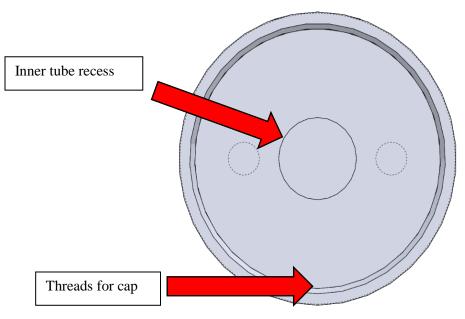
Outer Case with Inner Sleeve Mount Cutout Shown
